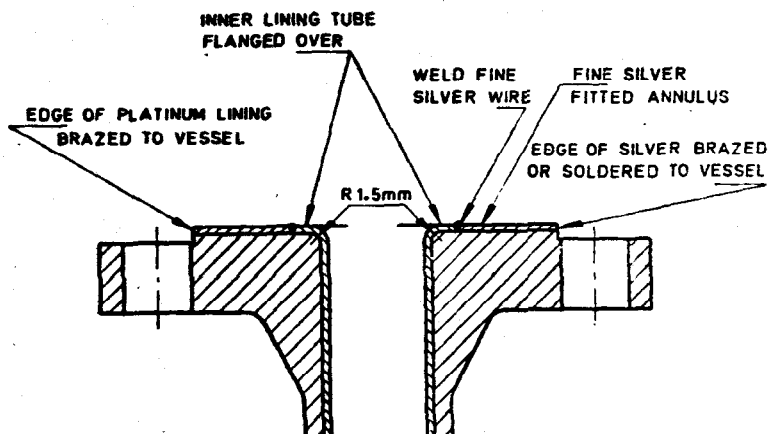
TYPICAL METHOD FOR LINING OF FLANGE FACE, LARGE DIAMETER
